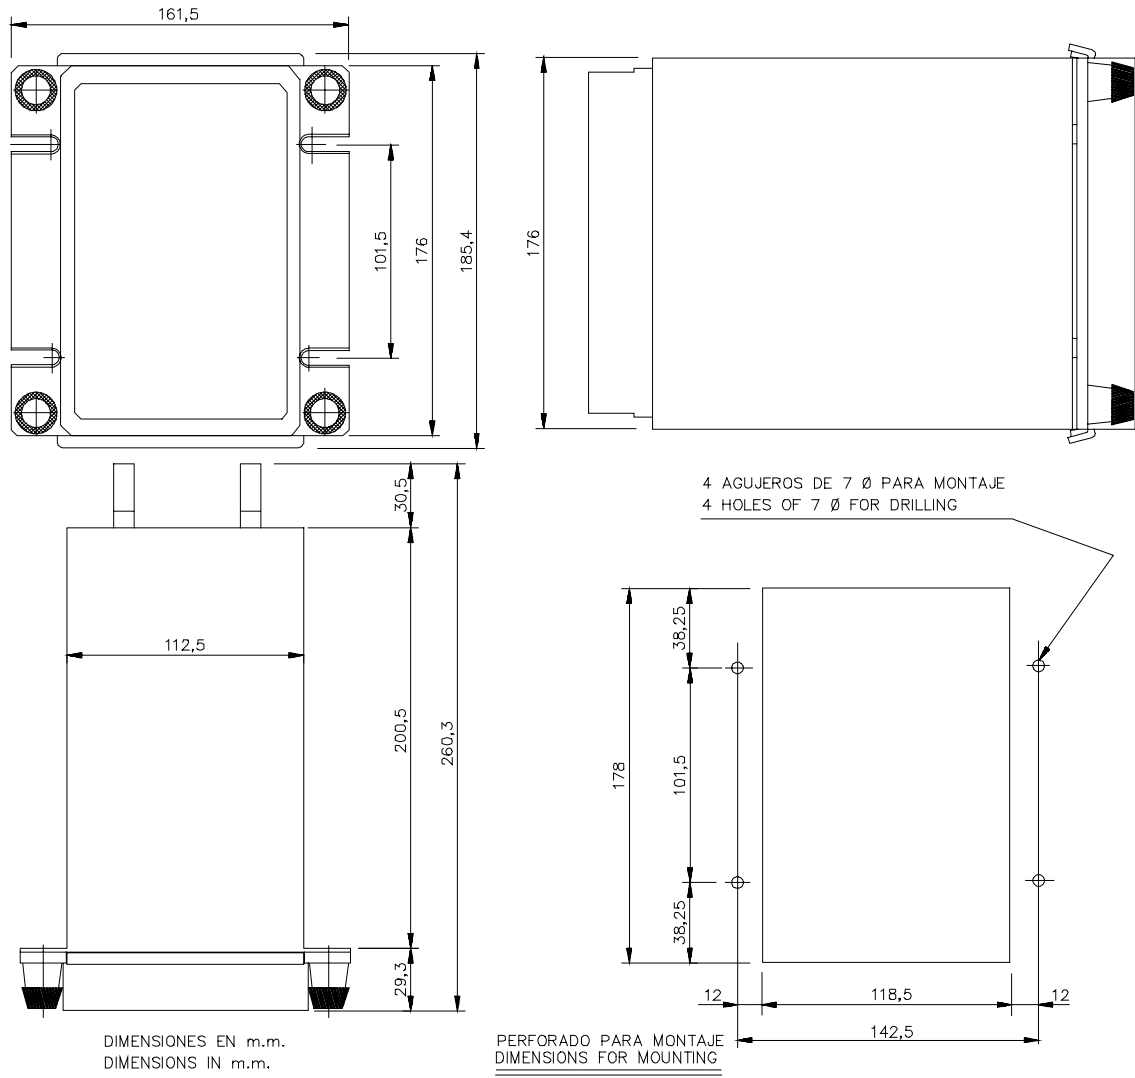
Dimensions and mounting of the MMC (drawout type) 226B6086F2
